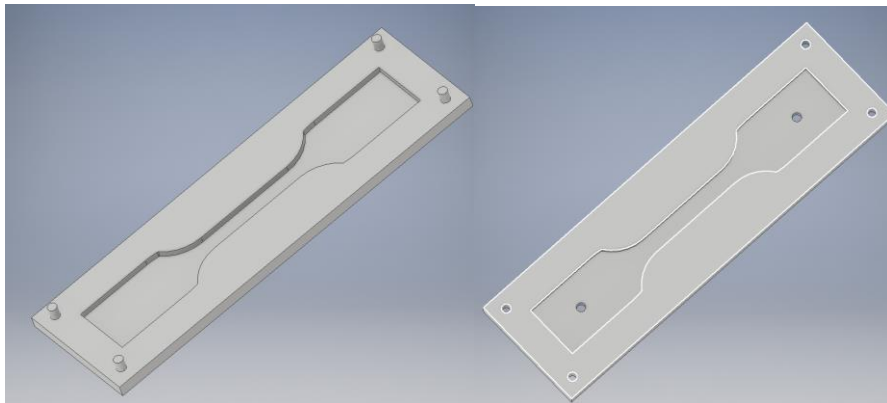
Dogbone Mold design in Autodesk Inventor following the ASTM D638 parameters
